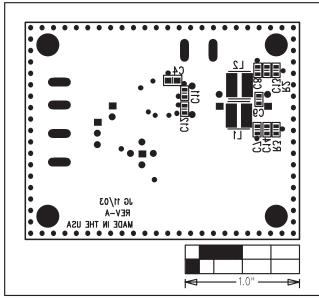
MAX9700B EV Kit Component Placement Guide— Solder Side
